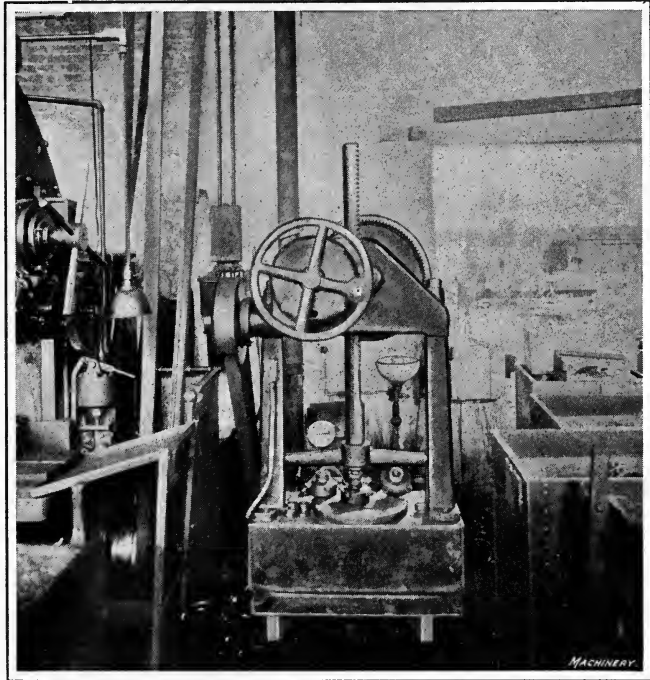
Arbor Press mounted on Skid so that it can be set in Place to press in Bushings during Performance of a Sequence of Machining Operations
